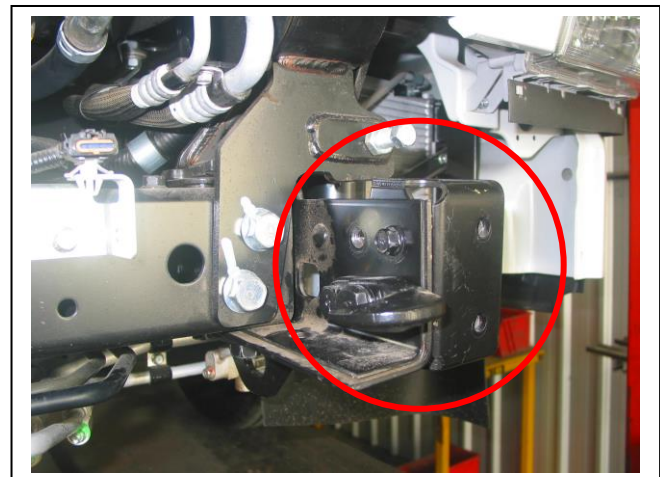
Grind off remaining weld. Drivers side shown
